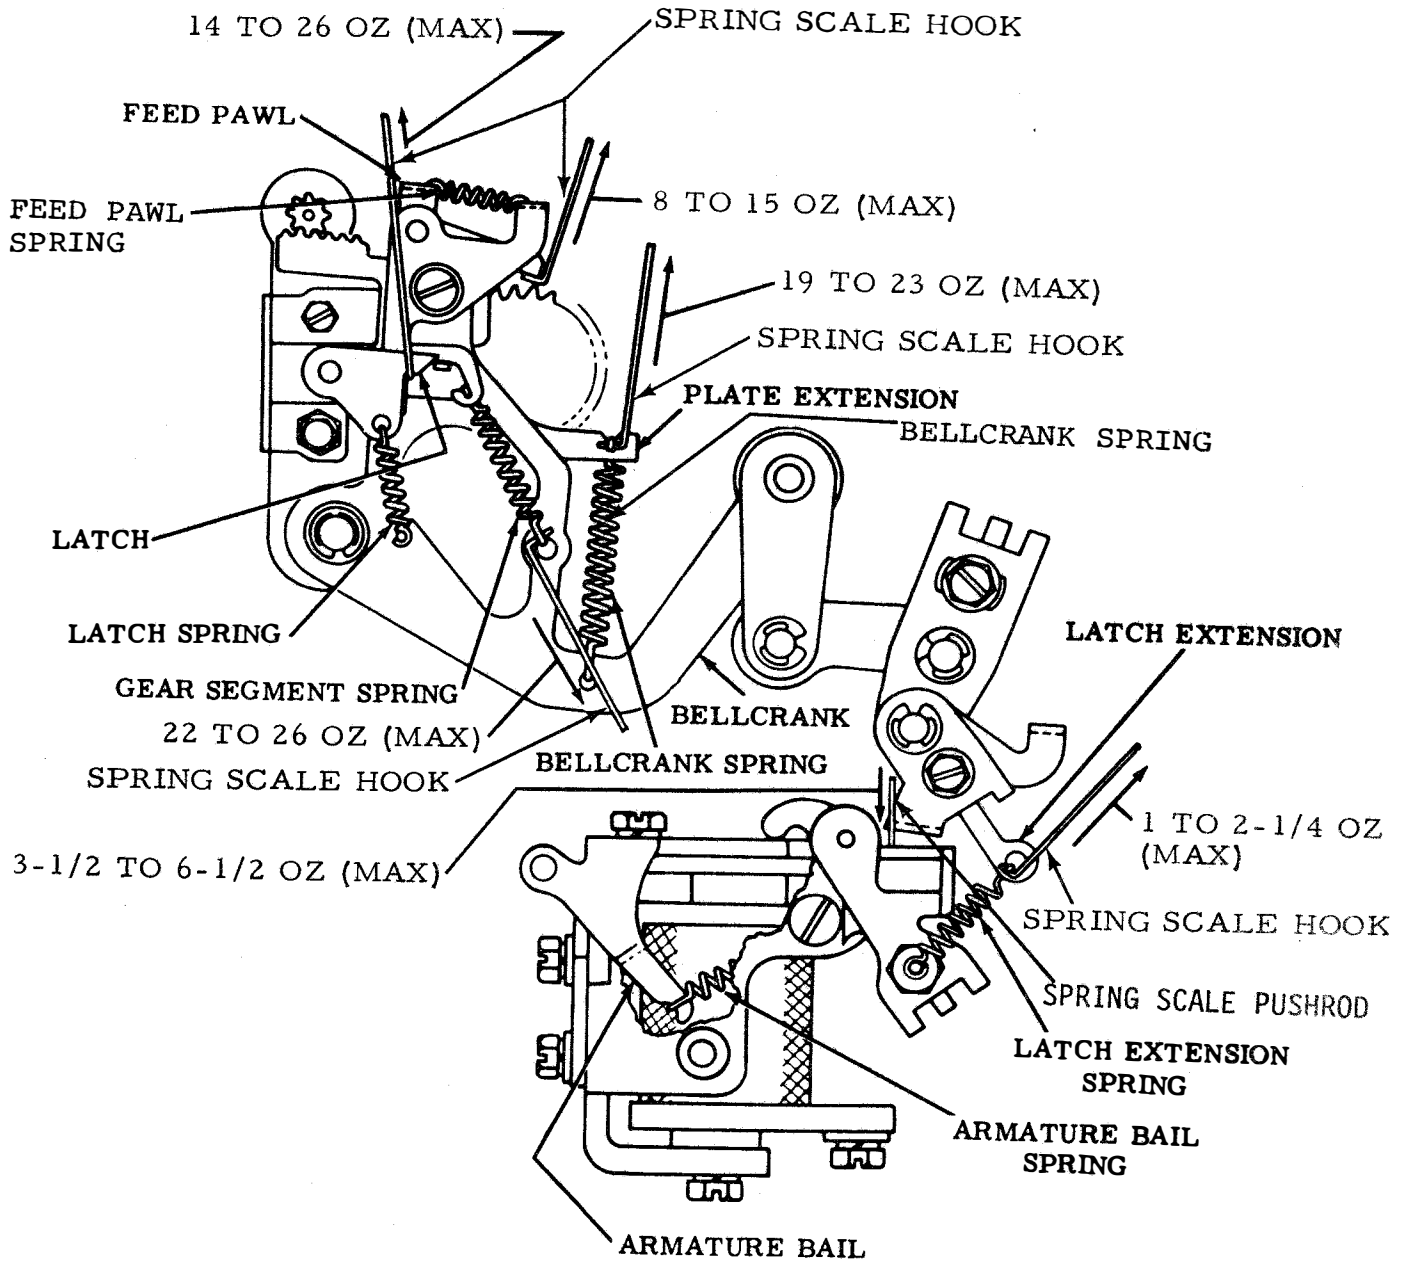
Latch, Feed Pawl, Bellcrank, Gear Segment, Armature Bail, and Latch Extension Springs (For Chadless Tape), Reperforator
